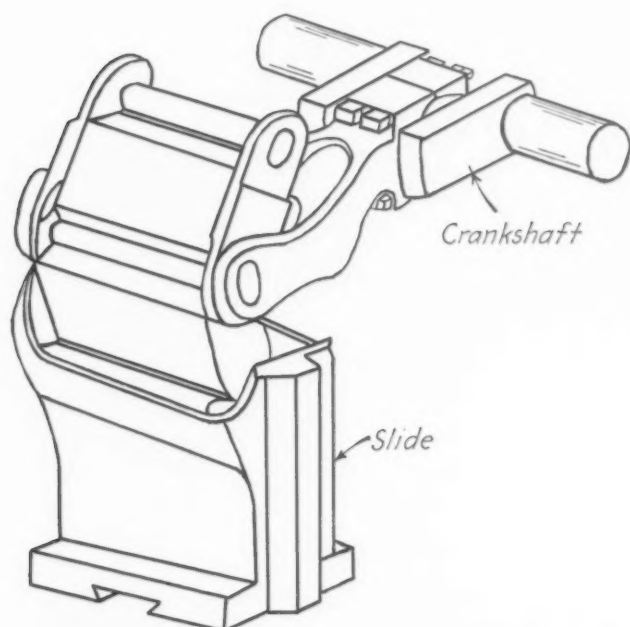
Knuckle-joint embossing press, showing relative position of the crank and the slide
